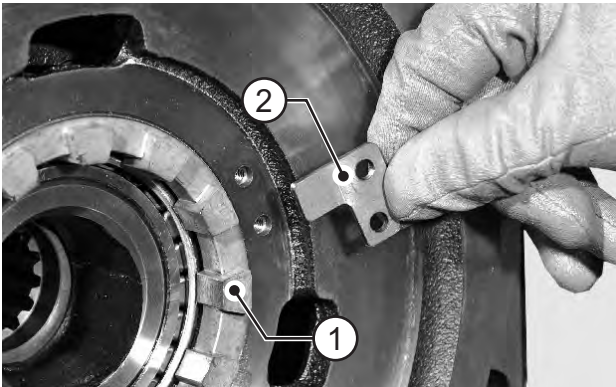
Only if need removing or adjusting. Mark the position of the ring nuts (3). Remove screws (1) and ring nut checks (2).
